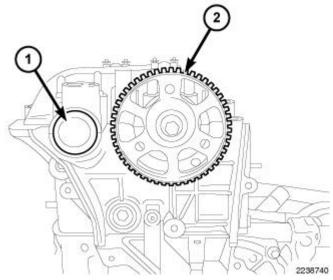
Camshaft Sprocket Courtesy of CHRYSLER LLC
